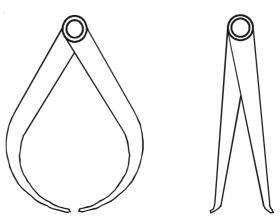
Calipers A. Outside caliper B. Inside caliper
